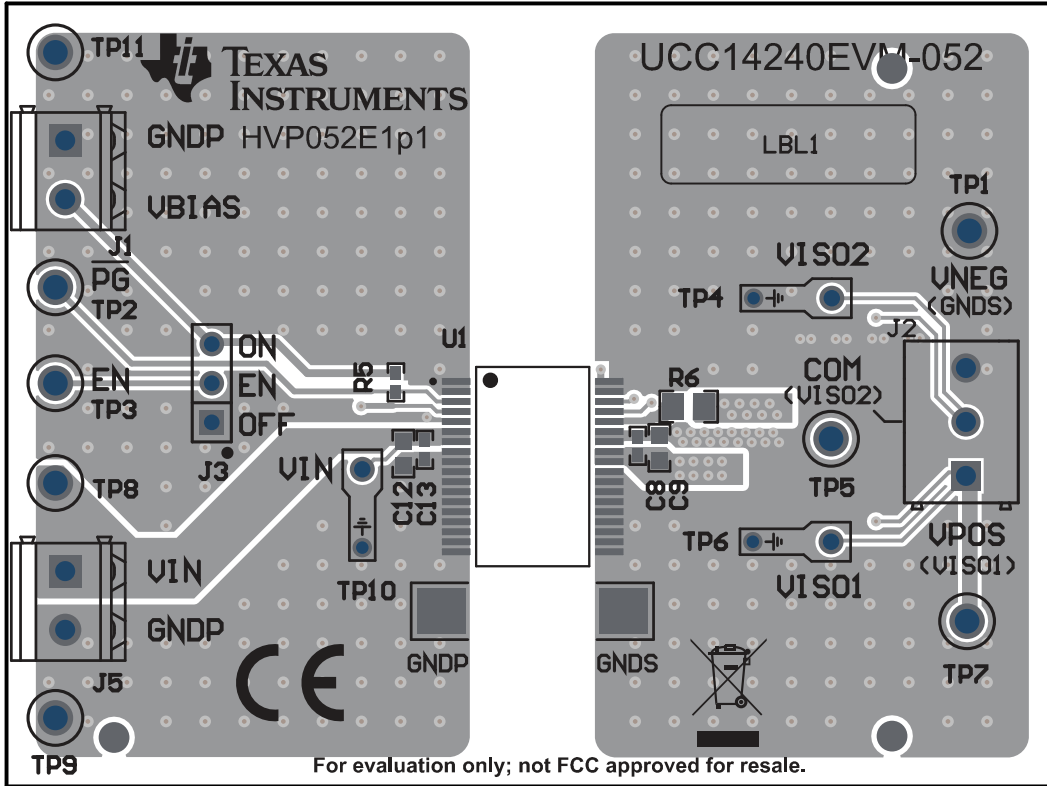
UCC14240EVM-052, PCB Top Layer, Assembly
